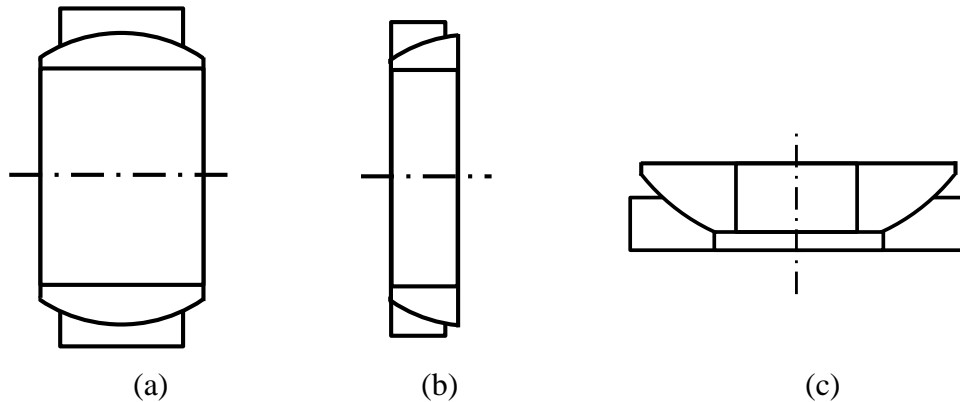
Spherical plain bearing types: (a) radial (b) angular contact (c) axial
